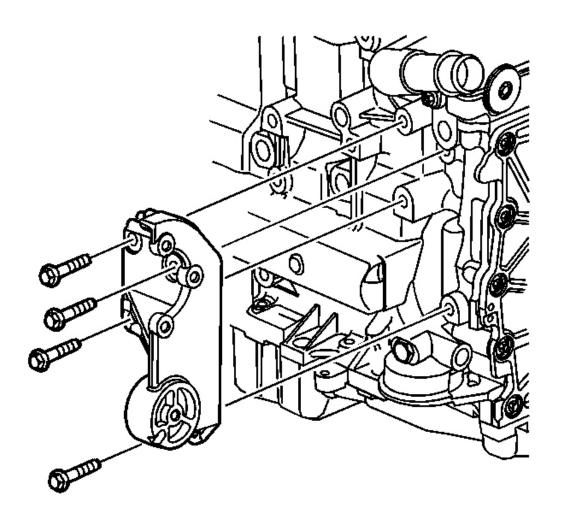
View Of Power Steering Pump Bracket Courtesy of GENERAL MOTORS CORP.
